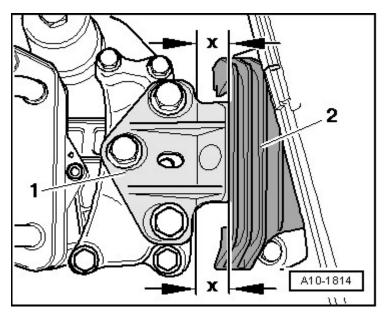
Ensuring Edges On Support Arm And Transmission Mount Are Parallel Courtesy of AUDI OF AMERICA, LLC
